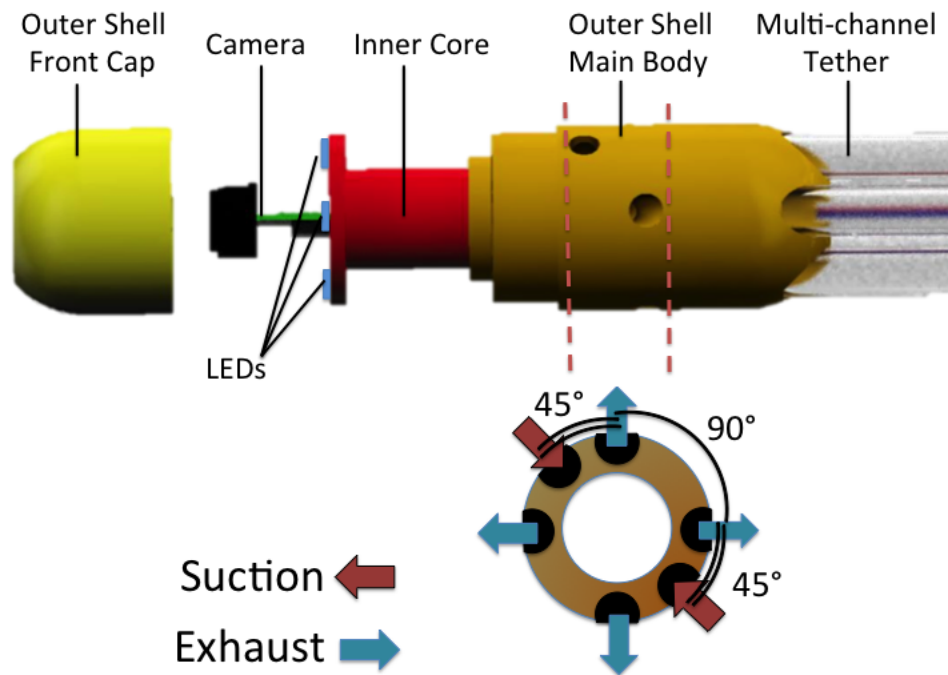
Exploded Diagram of Hydrojet Capsule Showing the Locations of Exhaust and Suction Ports
